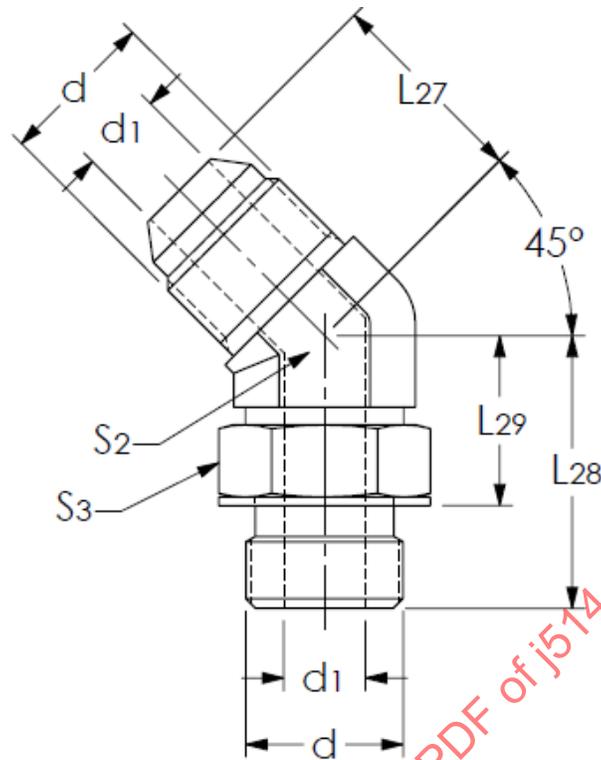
45 degree straight thread elbow (070320, 07M0320)
